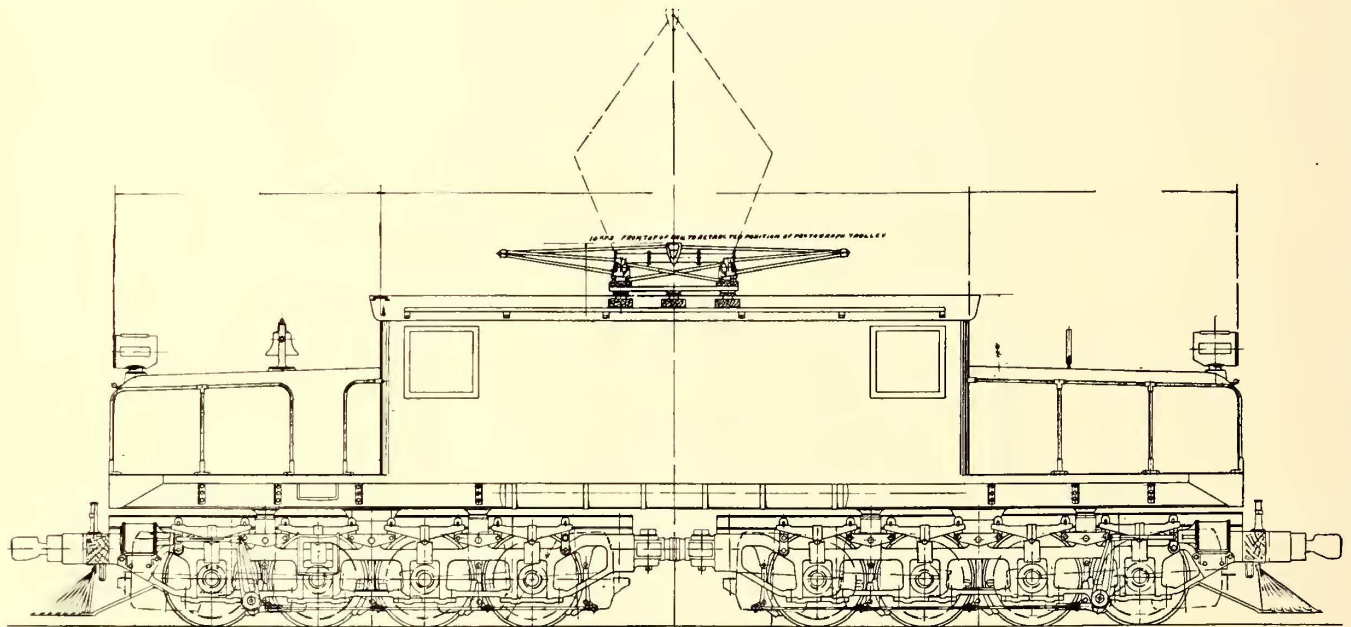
160-TON LOCOMOTIVE WITH MOTOR-GENERATOR SET CARRIED IN THE CAB
